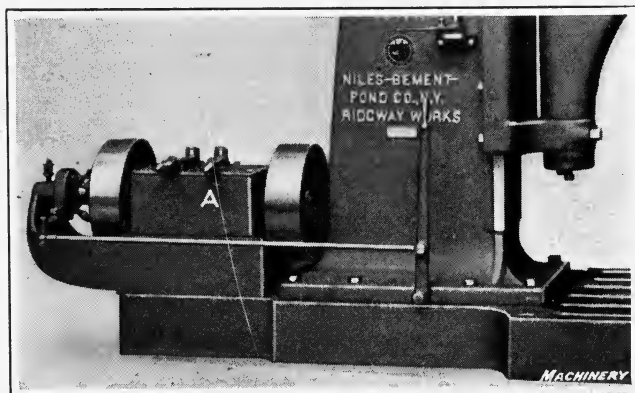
Four-speed 10-horsepower Speed-box attached to the Rear of a Radial Drilling Machine
